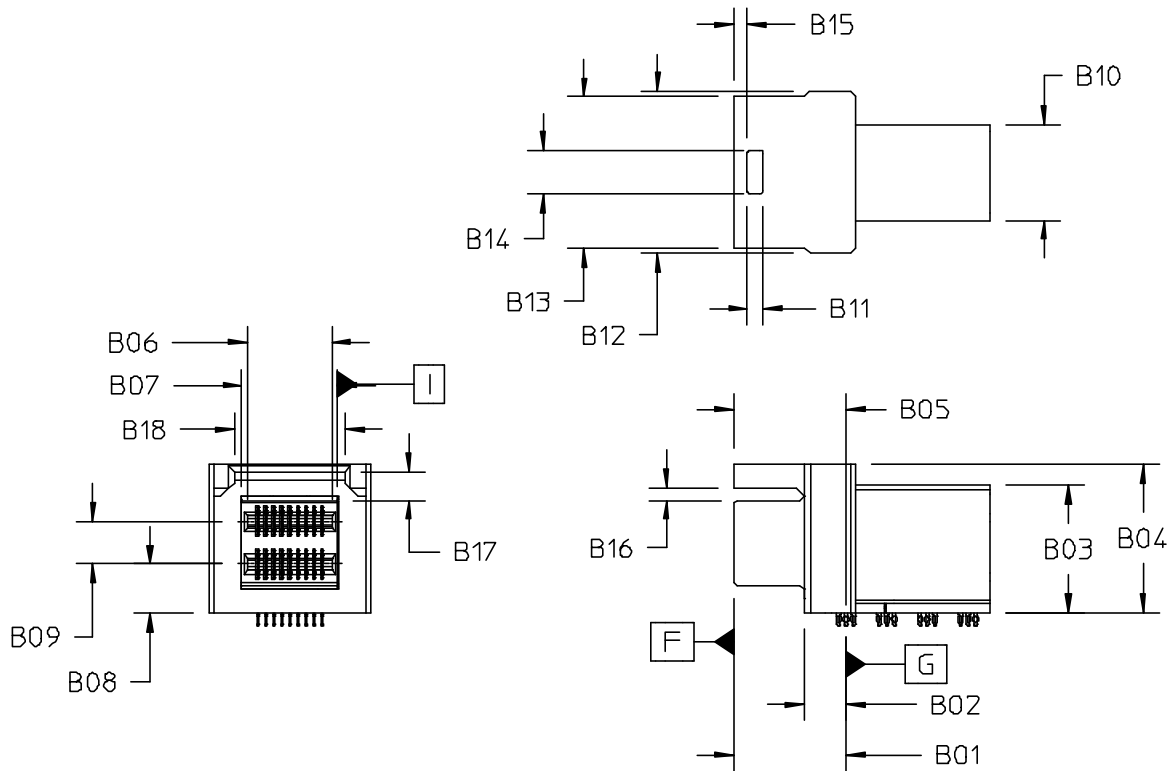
UNSHIELDED FIXED (RECEPTACLE) RIGHT ANGLE INTEGRATED HD CONNECTOR DIMENSIONS
